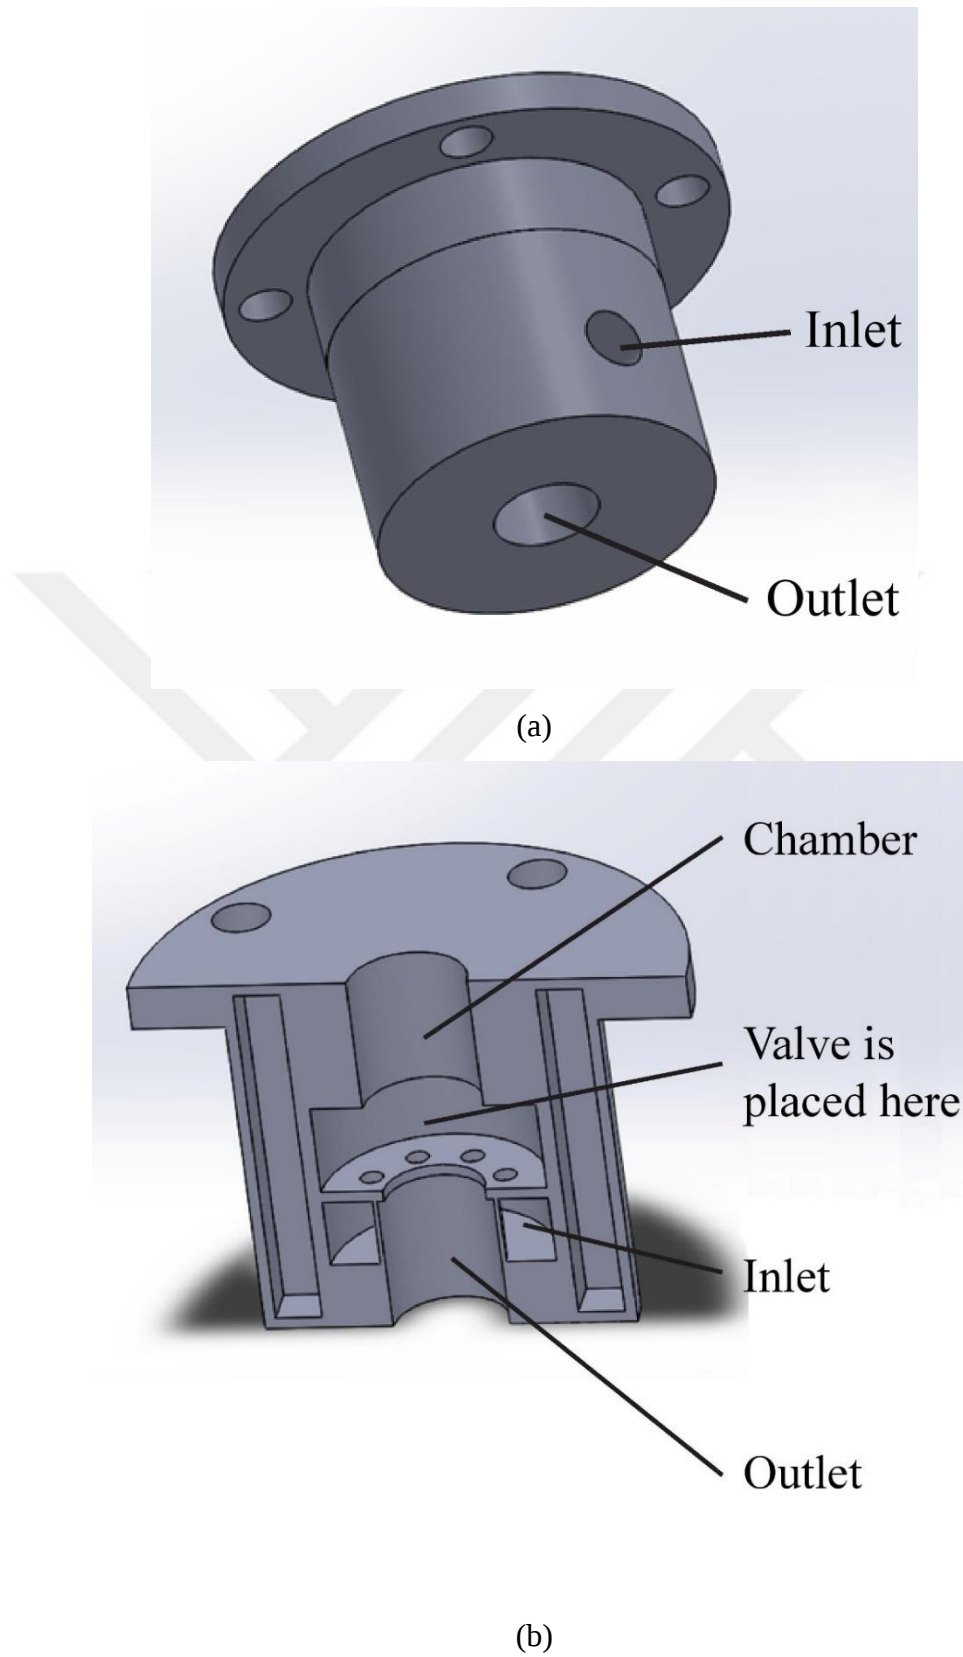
The manufactured valve housing for the duckbill-umbrella combination valve (a) CAD model (b) Cross-sectional view
